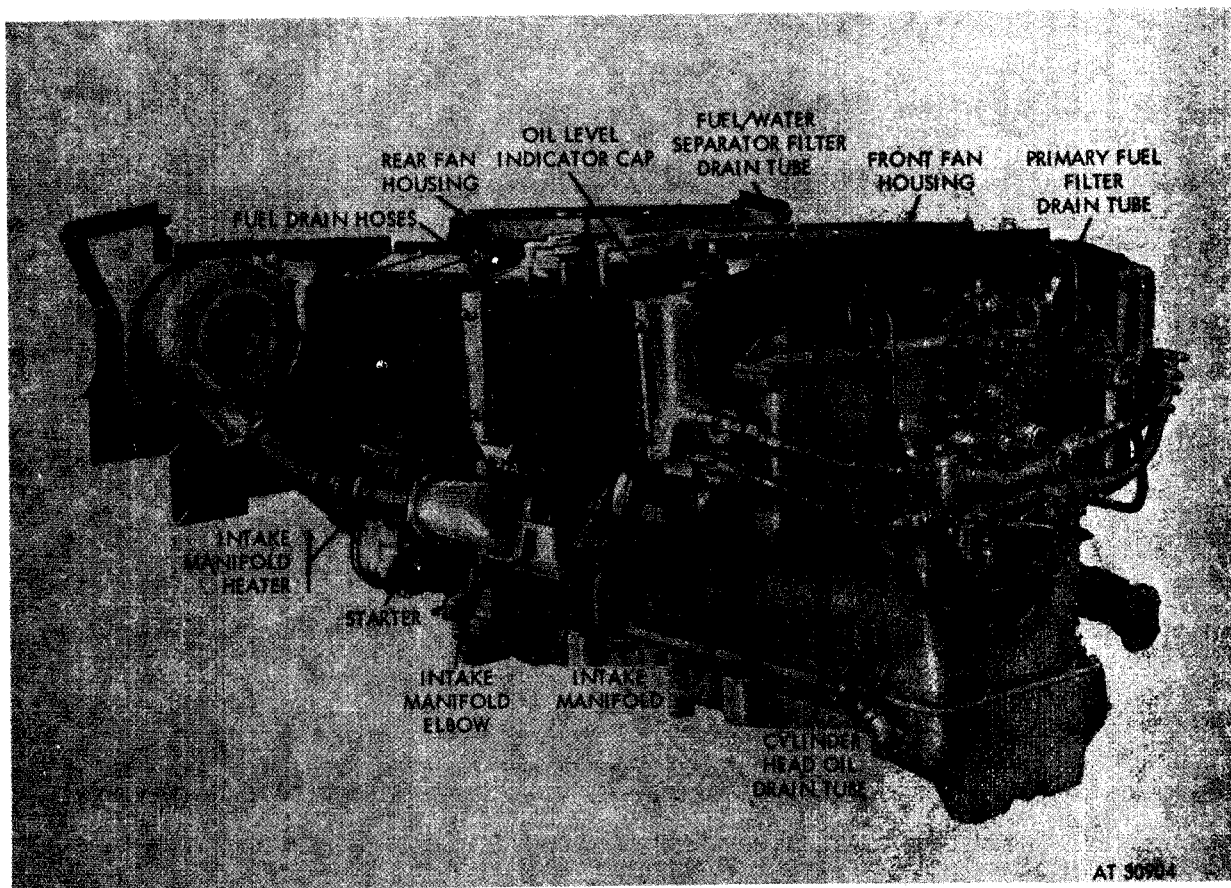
AVDS-1790-2A engine assembly with fuel / water separator filter-left front view.
